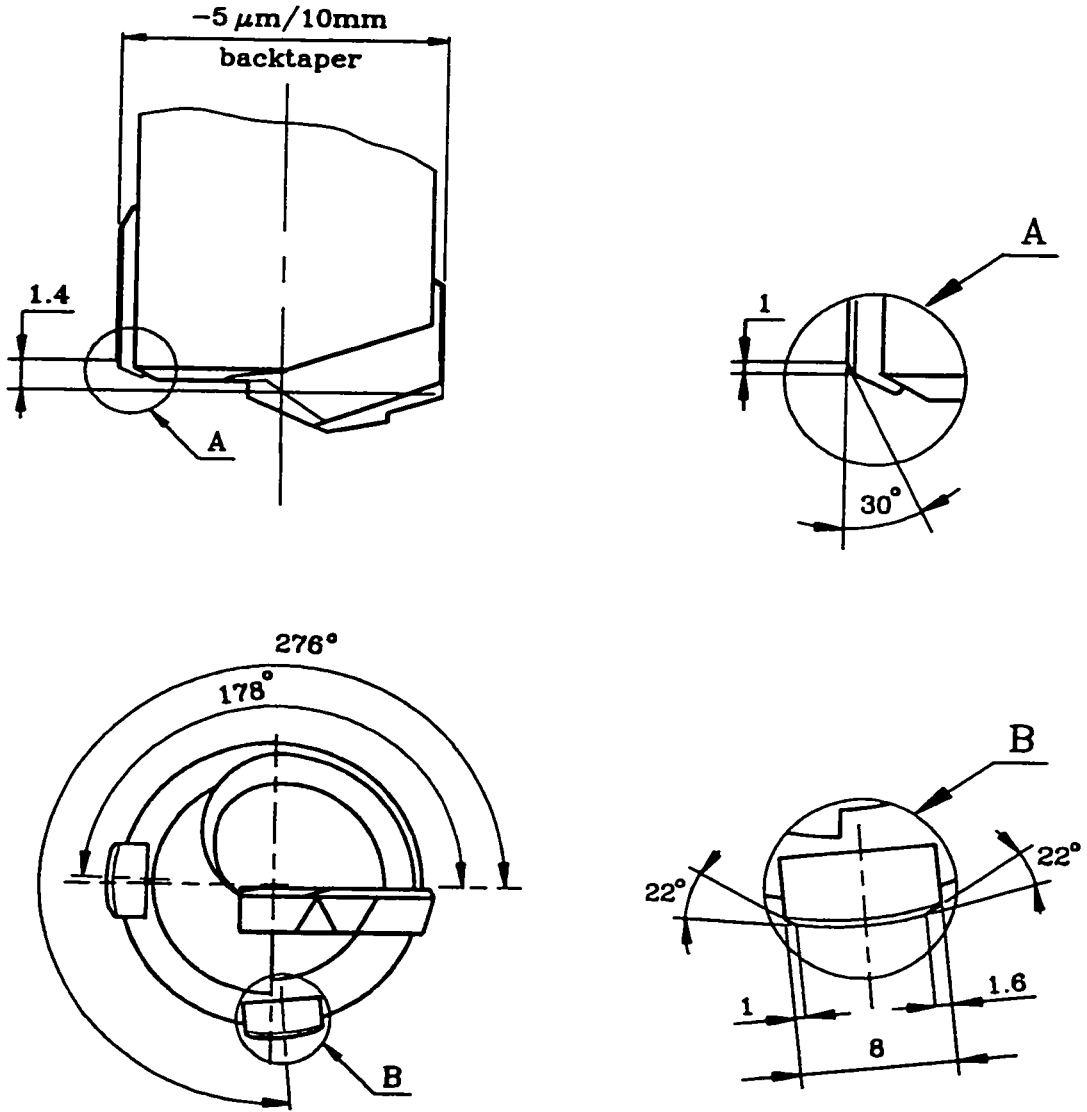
b. BTA-Type Drill of Heller Design (Burnishing Geometry)
